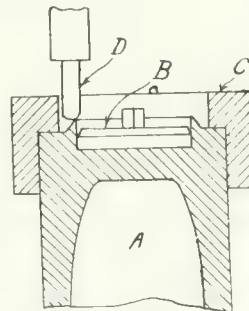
SKETCH SHOWING BASE PLATE RIVETING ARRANGEMENT
